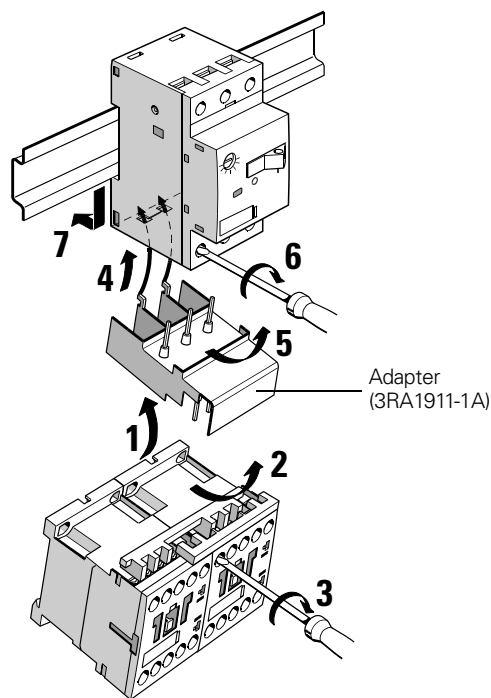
Self-assembly of a fuseless load feeder (frame size S00)
